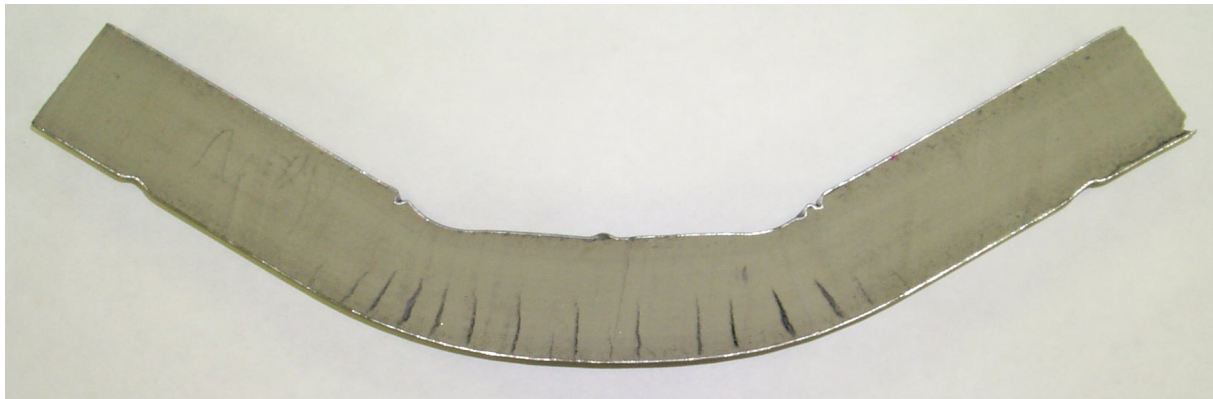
Buckling prevention, adhesion and failure mechanism of structural BETAFOAM™
